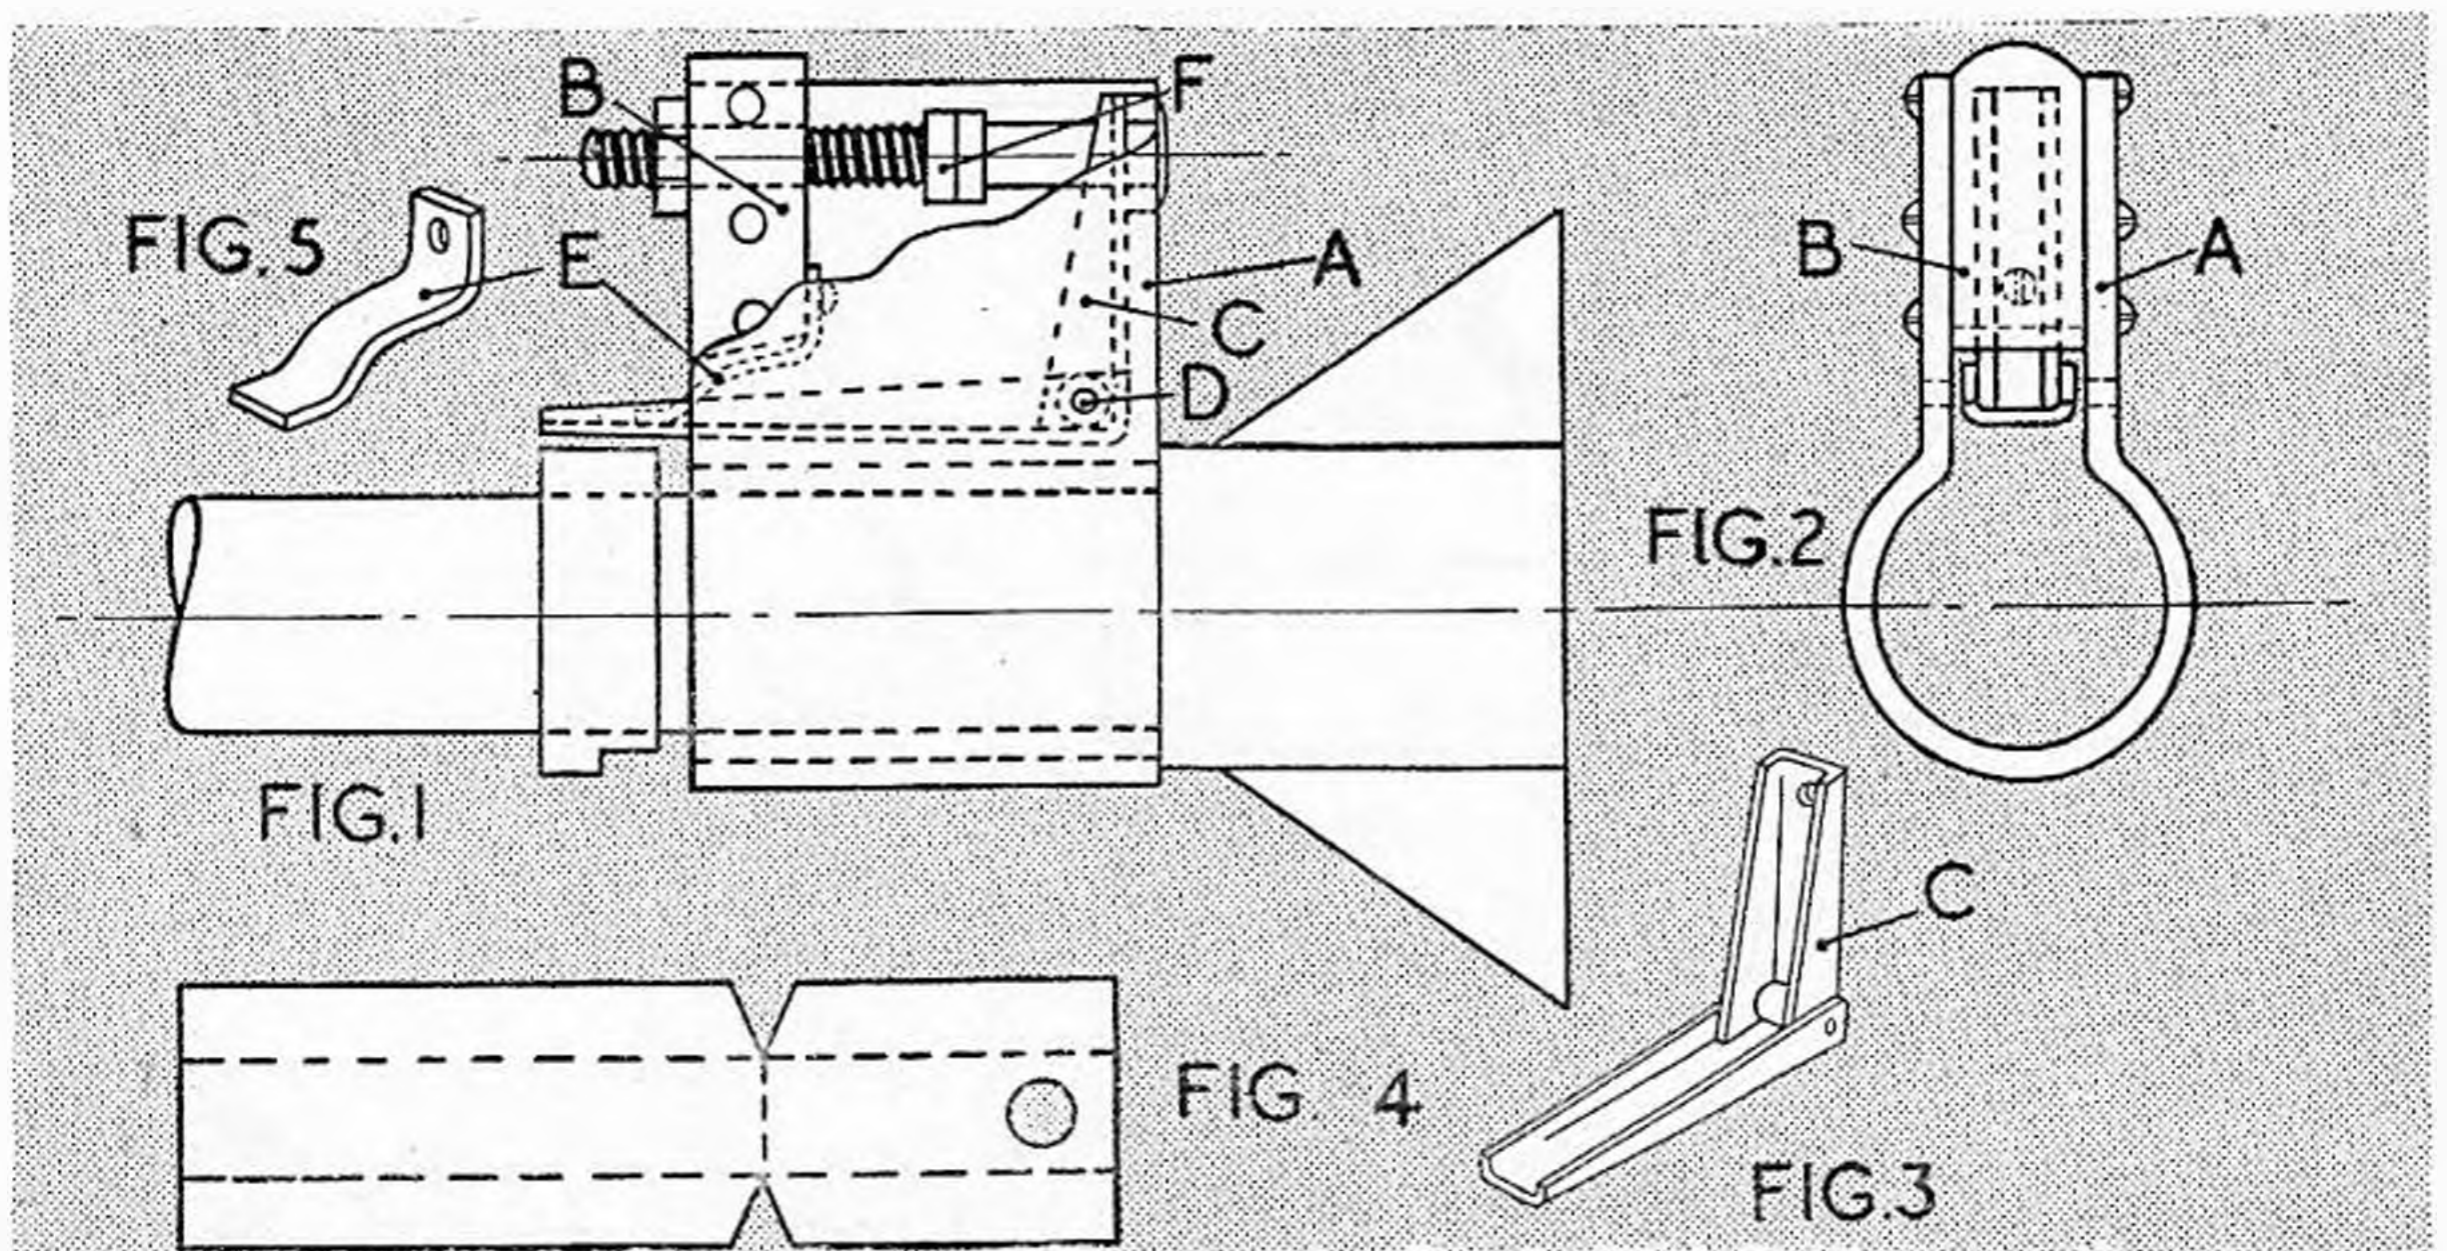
shows the assembly viewed from the front, the screws holding the bakelite piece B are 10 B.A.; the contact points which I used had $\frac{1}{4}$ B.A. thread.
